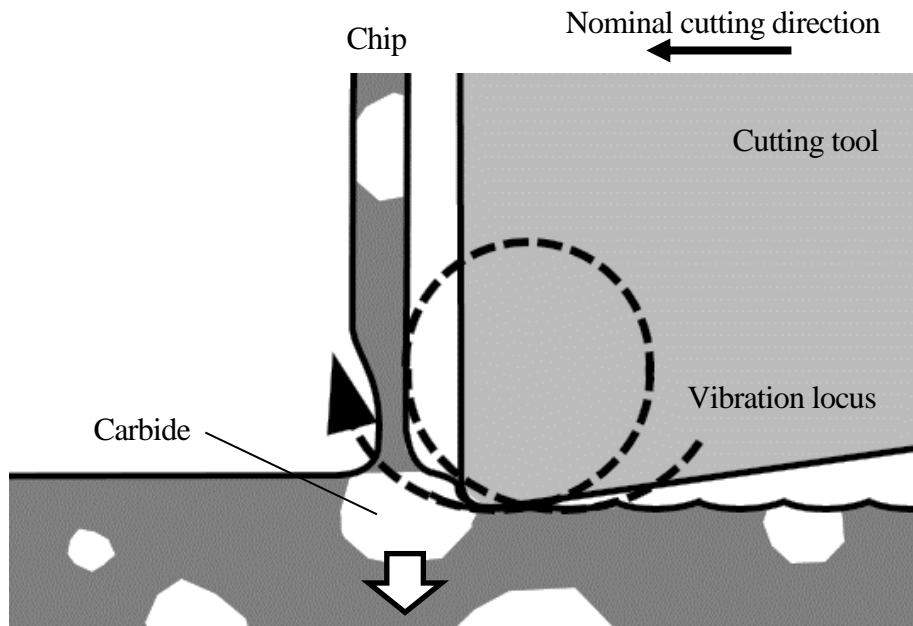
Schematic drawing of slip of cutting tool due to hard carbide.
